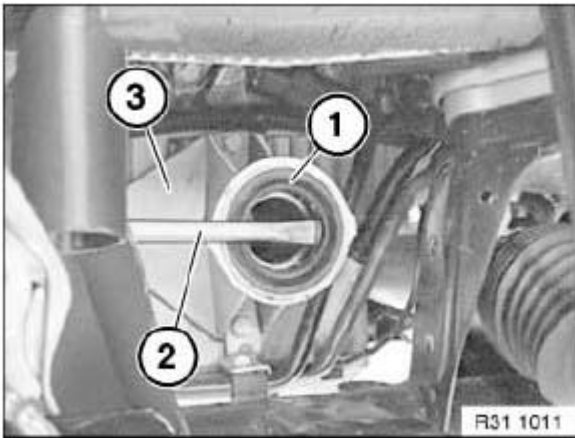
Identifying Shaft Seal, Screwdriver And Bearing Block
